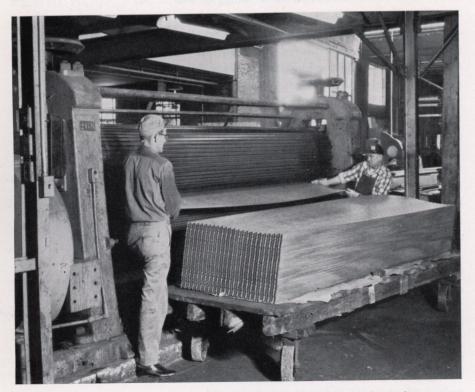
Matched roller dies corrugate aluminum roofing sheet to close tolerances on high production basis. Operators merely feed sheet to work rolls.
